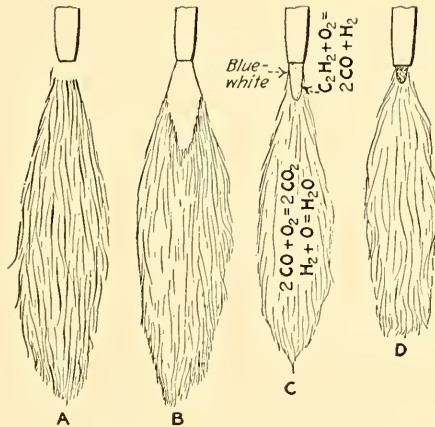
Characteristics of the Oxy-Acetylene Welding Flame.
